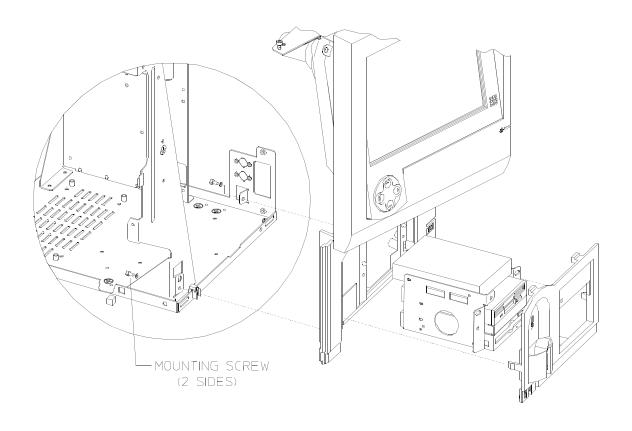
Operator Panel Bottom Mounting Screws
